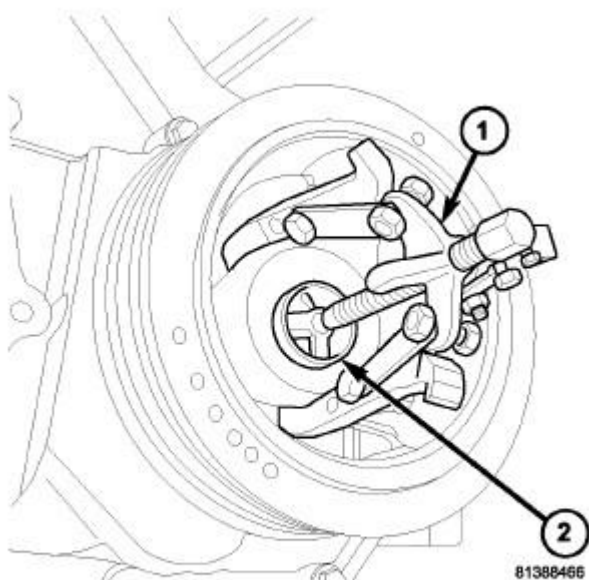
CRANKSHAFT DAMPER REMOVAL
